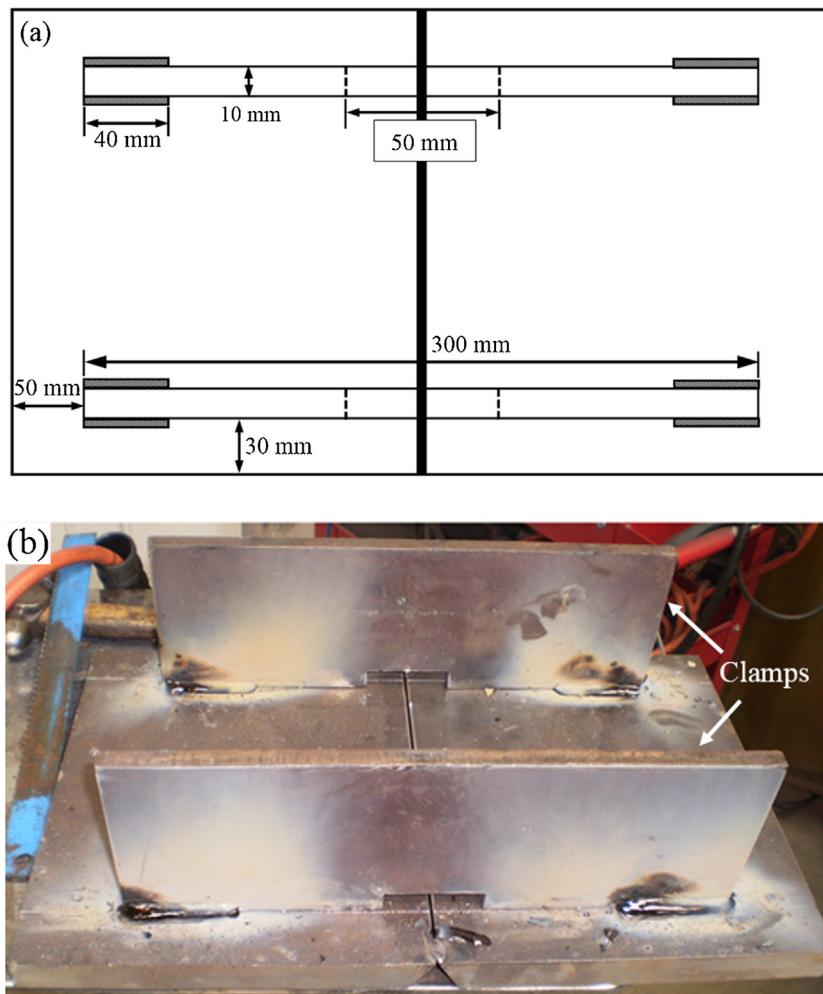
Experimental set up with (a) a schematic of the clamp position and (b) welding specimen.
